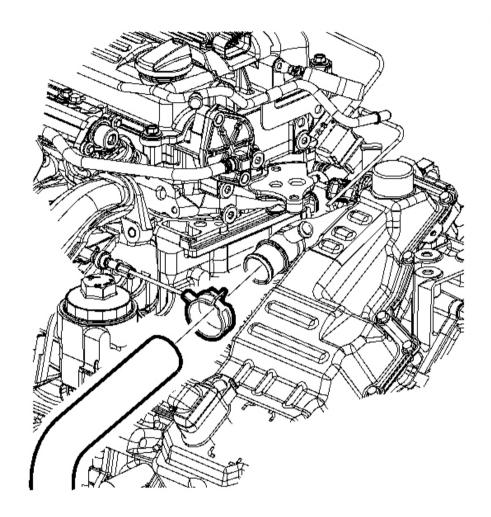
View Of Radiator Outlet Hose Clamp From The Engine Courtesy of GENERAL MOTORS CORP.
